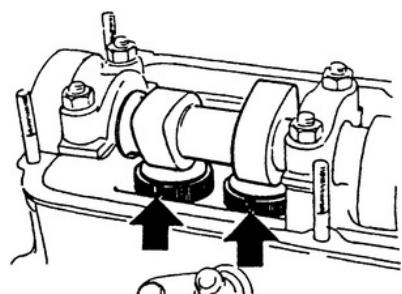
Attach tool 5022, or an equivalent valve depressor, and remove the disc — B230F and B230FT engines
